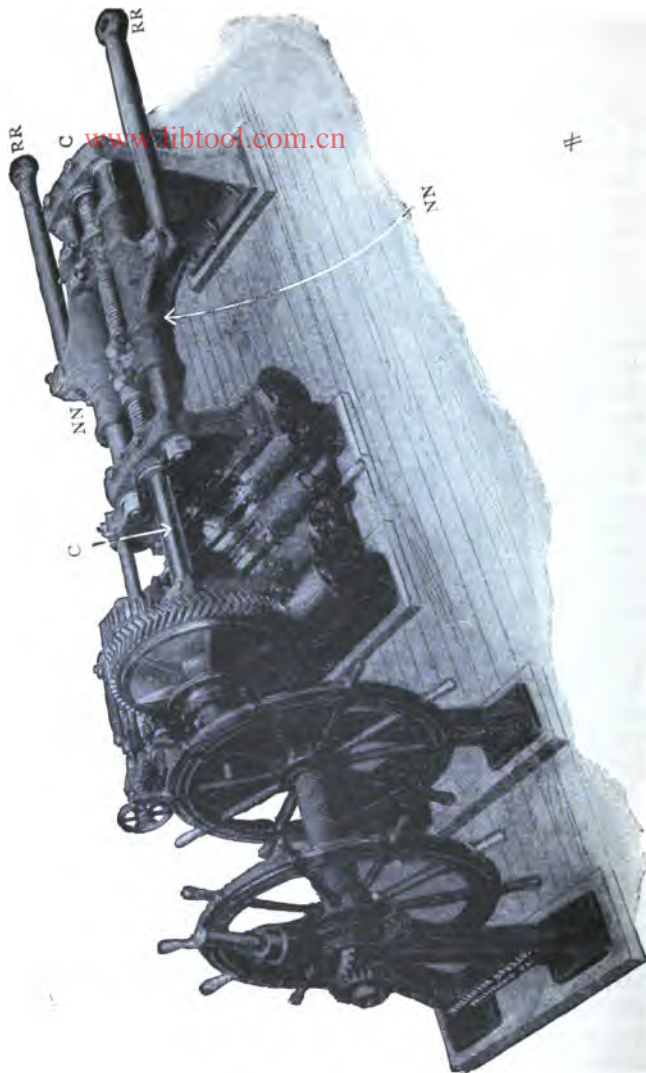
Rudder Mechanism with Williamson Steering Engine.
